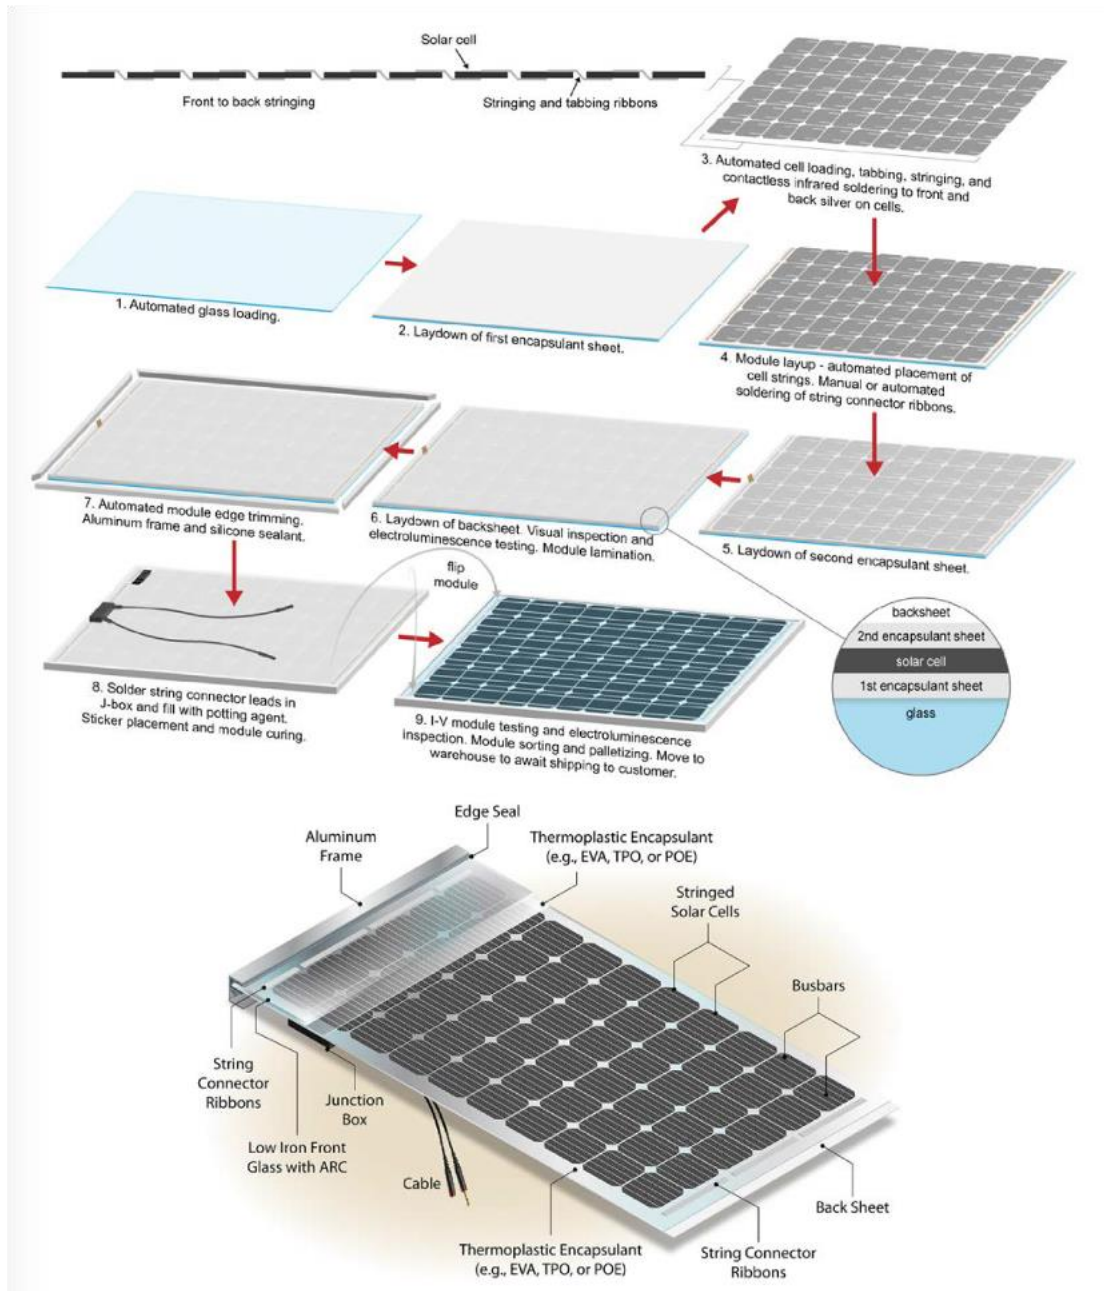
Process flow for a glass/backsheet solar module assembly. Source: NREL⁷⁴
